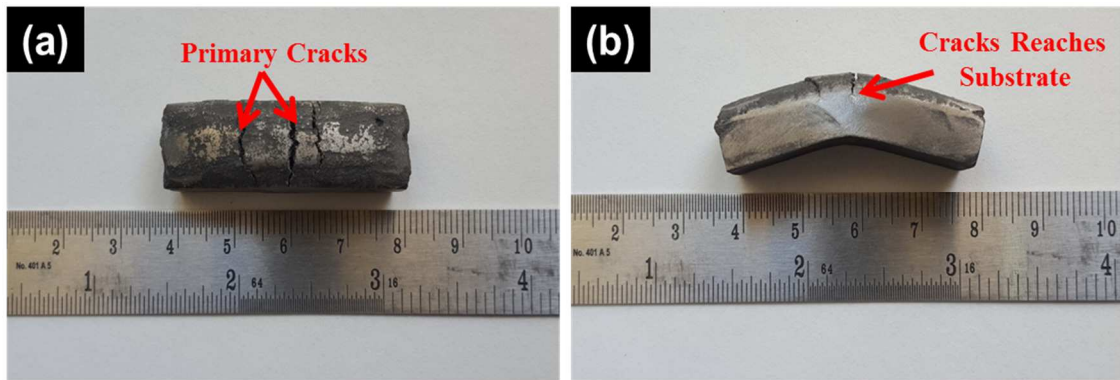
Photographs of the fractured clad specimen after three points bend test of showing (a) Top view of Ni-Based/40Cr₃C₂ composite clad (b) Side view of Ni-Based/40Cr₃C₂ composite clad
